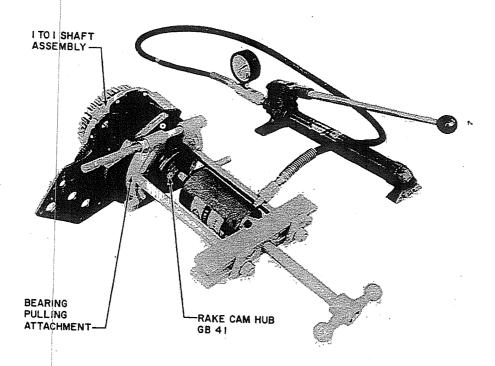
1 to 1 Shaft, Removal of Rake Cam Hub GB41
